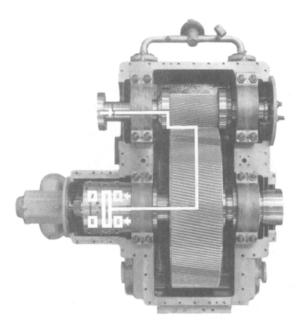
Working principle of thrust transmission shown on a single helical precision gear.
